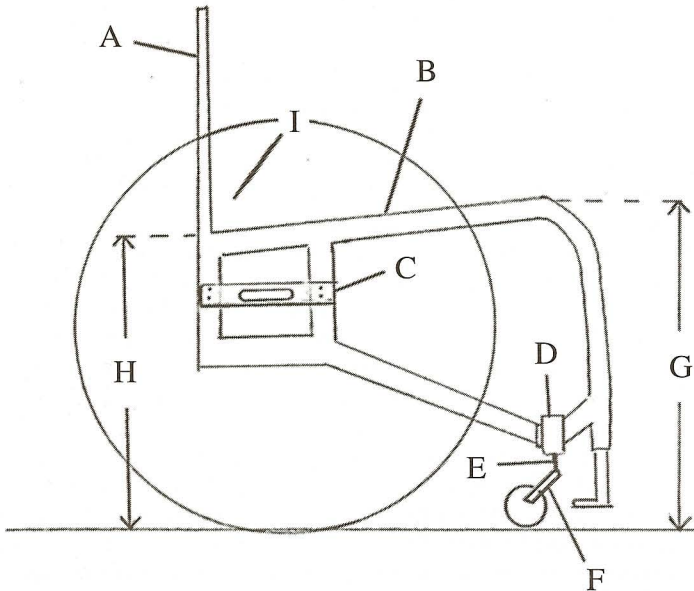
Components of the manual wheelchair: A = backrest; B = seat rail; C = axle plate; D = caster housing; E = caster stem bolt; F = caster fork; G = front seat to floor height; H = rear seat to floor height; I = inside back to seat angle.
